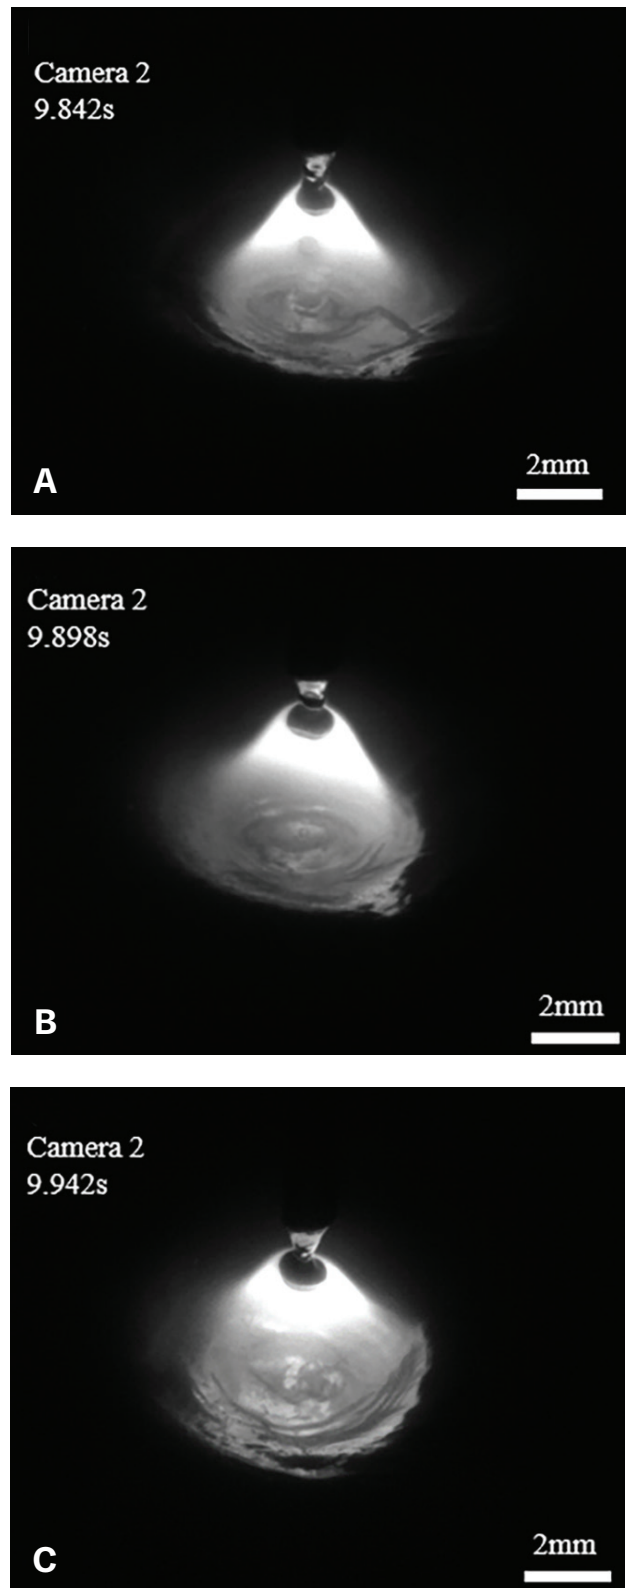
Weld pool image acquired within ± 0.05 s at the location of section III in Fig. 2. A — 9.842 s; B — 9.898 s; C — 9.942 s.
